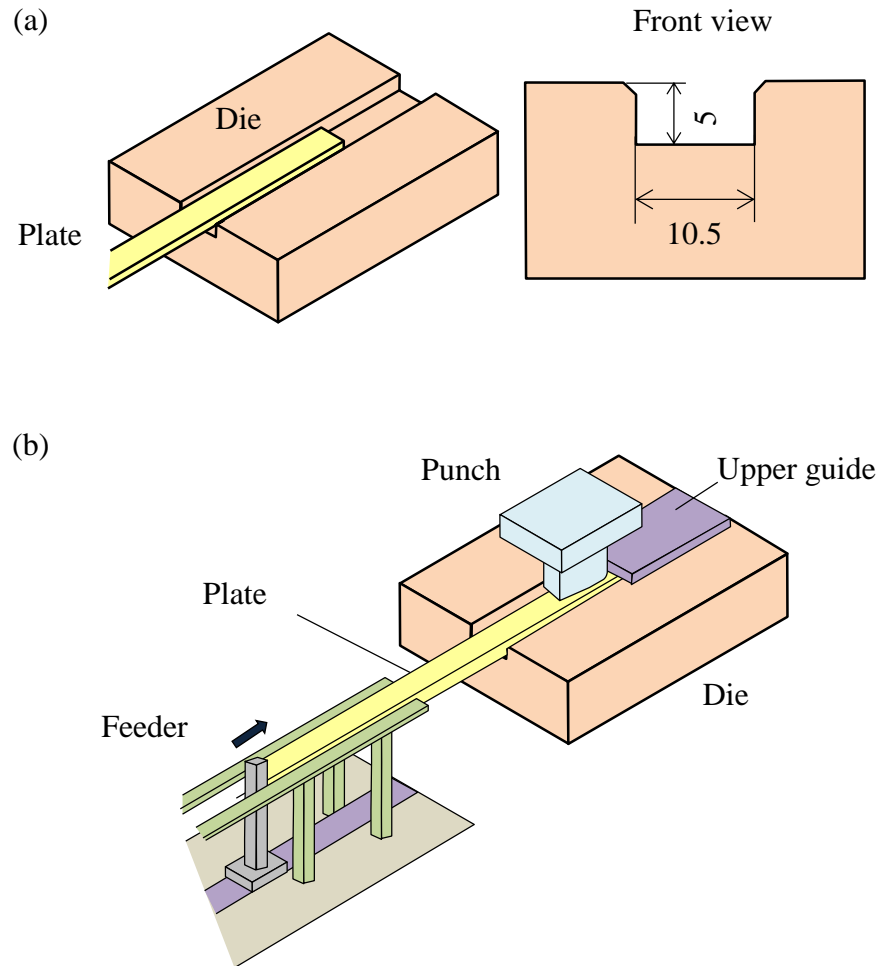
(a) Grooved die for preventing curvature of formed plate (b) experimental setup with grooved die.
